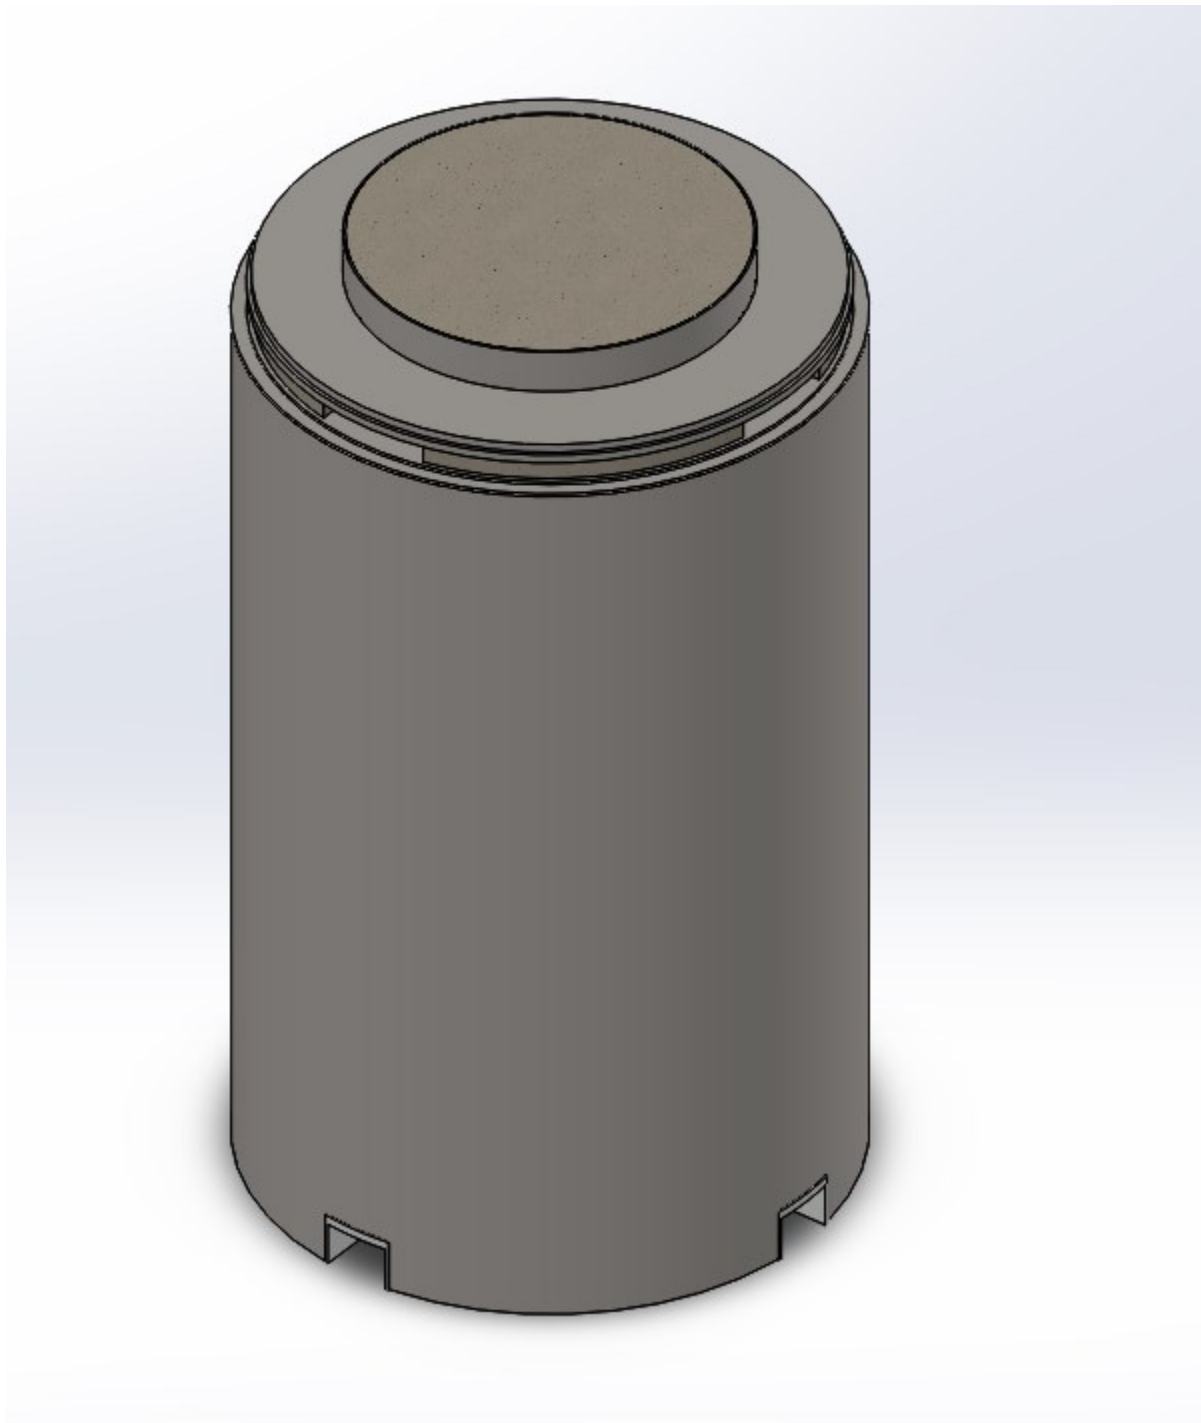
The sensor car train CAD model bottom isometric view.
